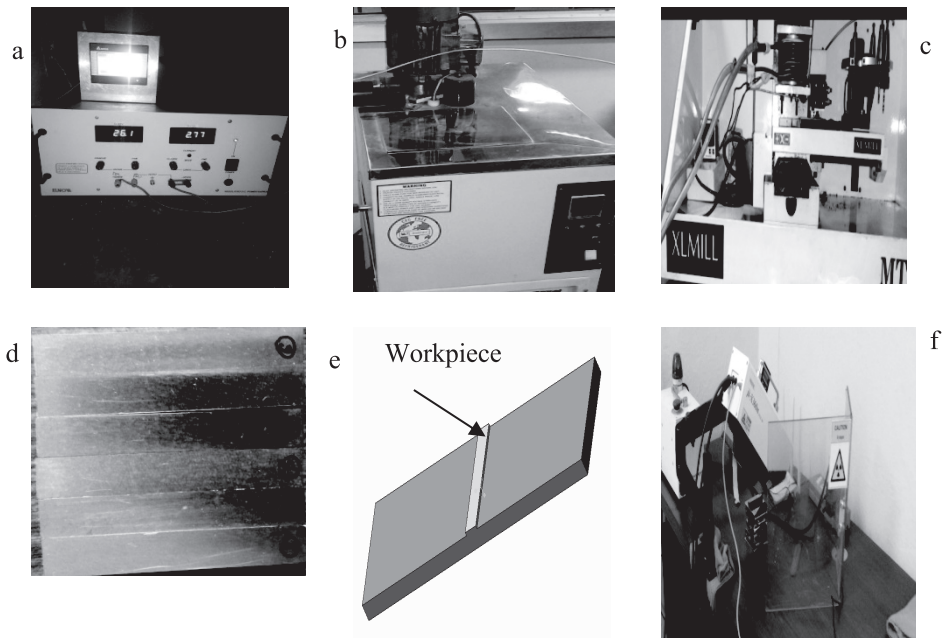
(a) Pulse DC power supply (b) Chiller for cooling the finishing tool (c) BEMRF setup (d) EN-31 Surface after Finishing (e) Schematic of die with work-piece (f) X-ray residual stress analyzer
